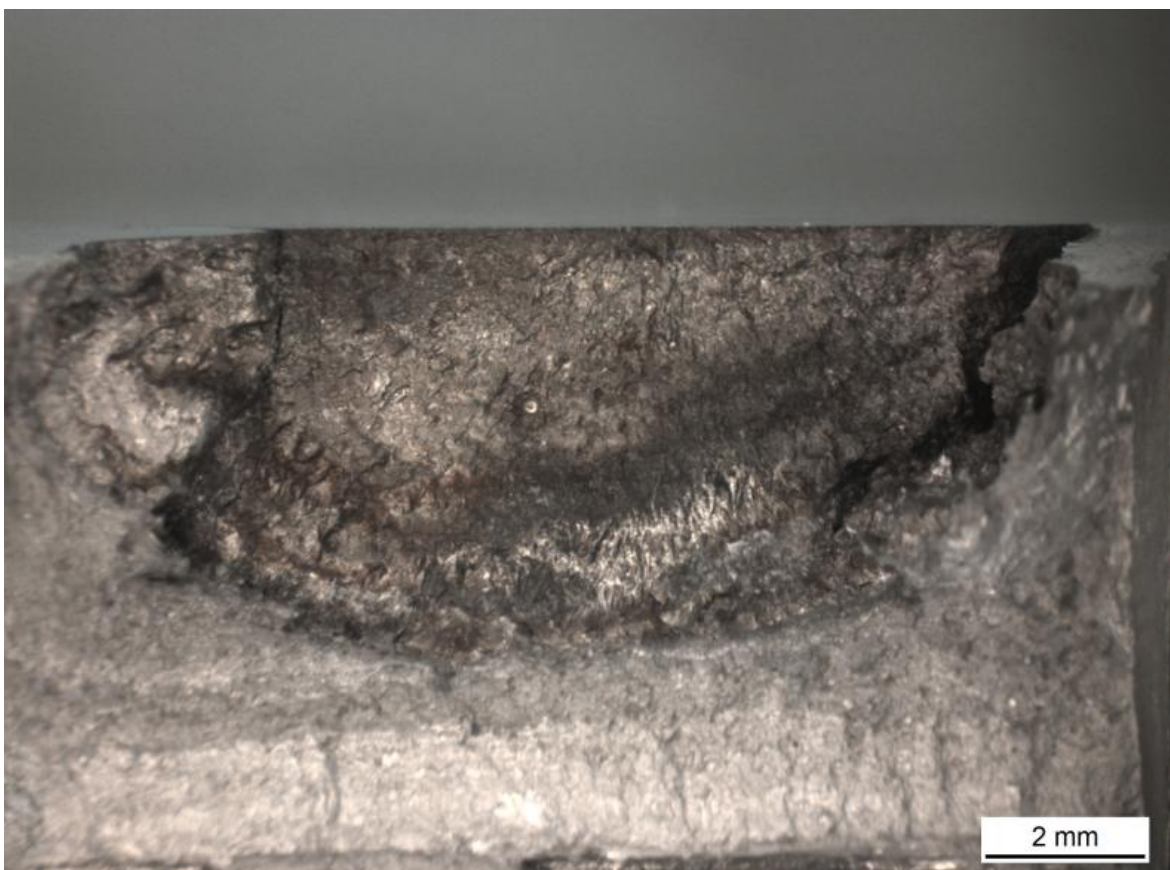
Photograph of the surface of the crack in test piece TF. [1]
